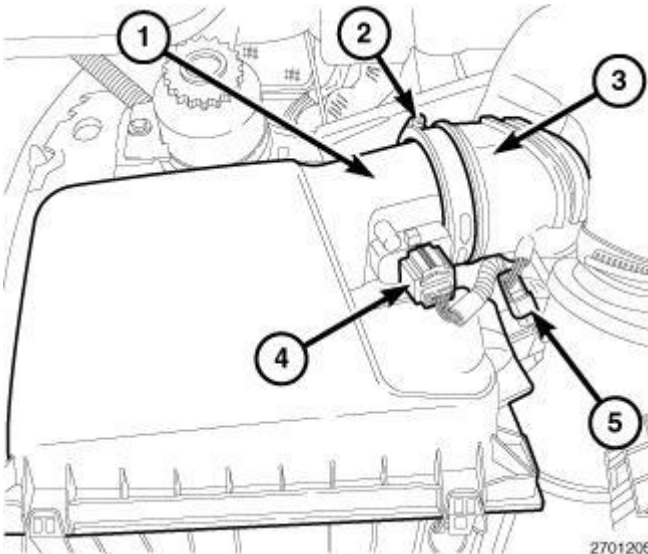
Identifying Air Cleaner Housing, Worm Clamp, Air Cleaner Outlet Tube, MAF Sensor & IAT Sensor
